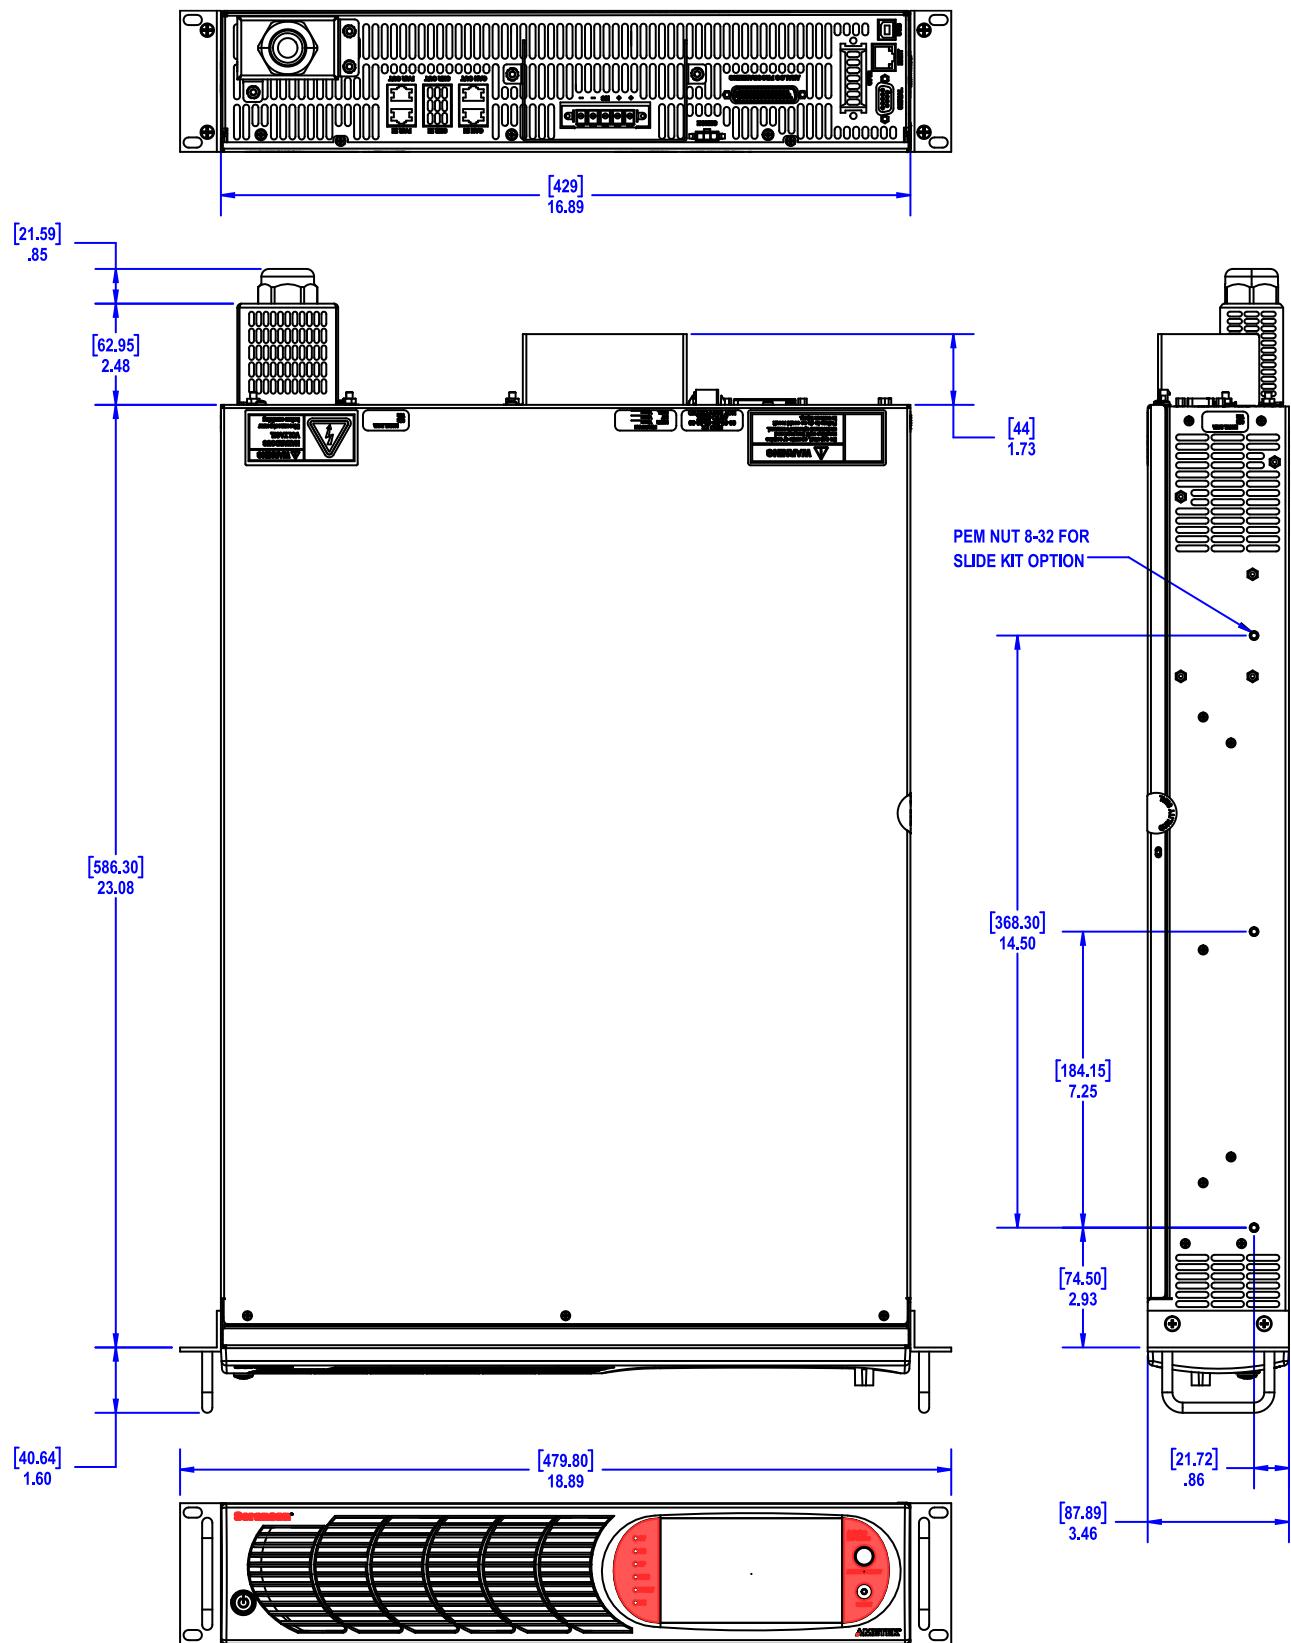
Installation Drawing, Enhanced (front panel version) 2U Models
